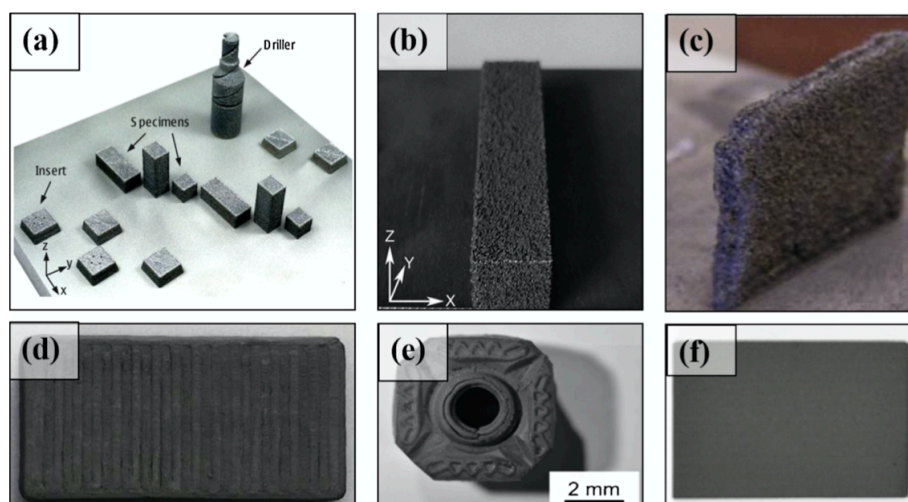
Cermets specimens produced by different AM processes a) SLM, b) DED, c) LENS, d) BJ, e) Extrusion-Based 3D printing, and f) gel printing [72].
